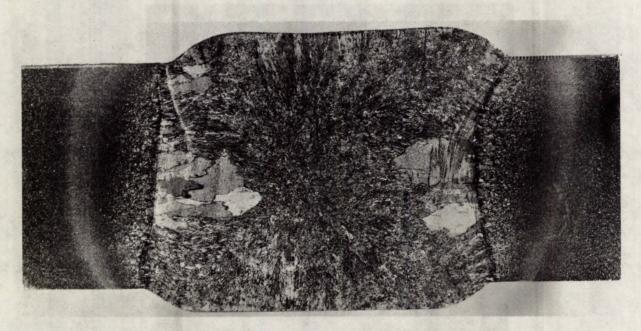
From weld specimen MR16. Electroslag process, Linde MC-70 electrode, Linde 124 flux, vertical-up position.
